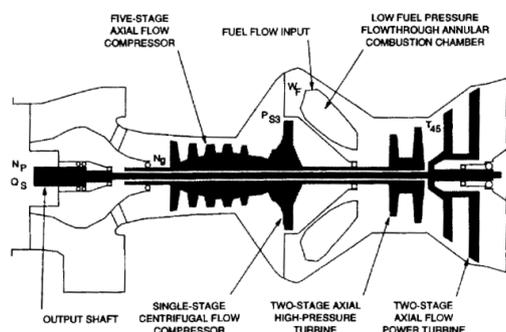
Cross section of a T700 turboshaft engine<sup>[9]</sup>
